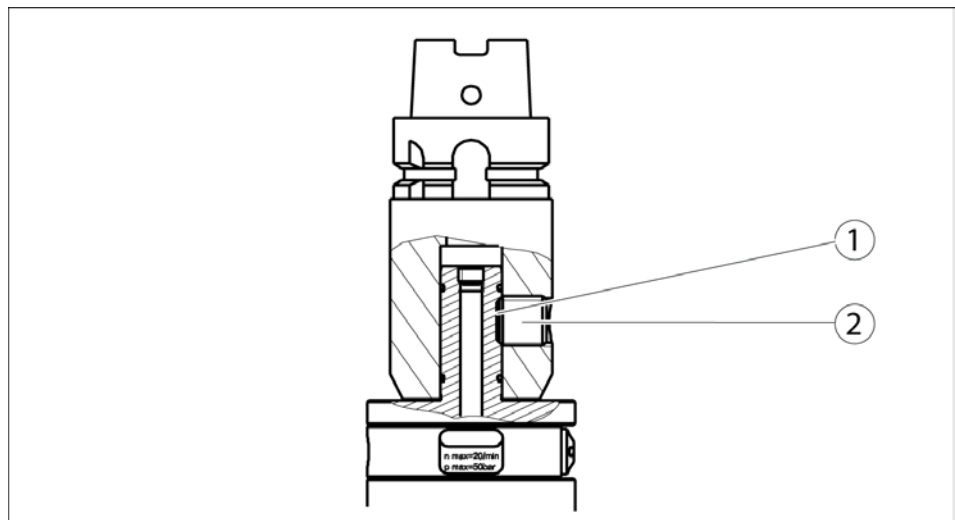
GSW-M sectional view of GSW-M clamped in WELDON mount
